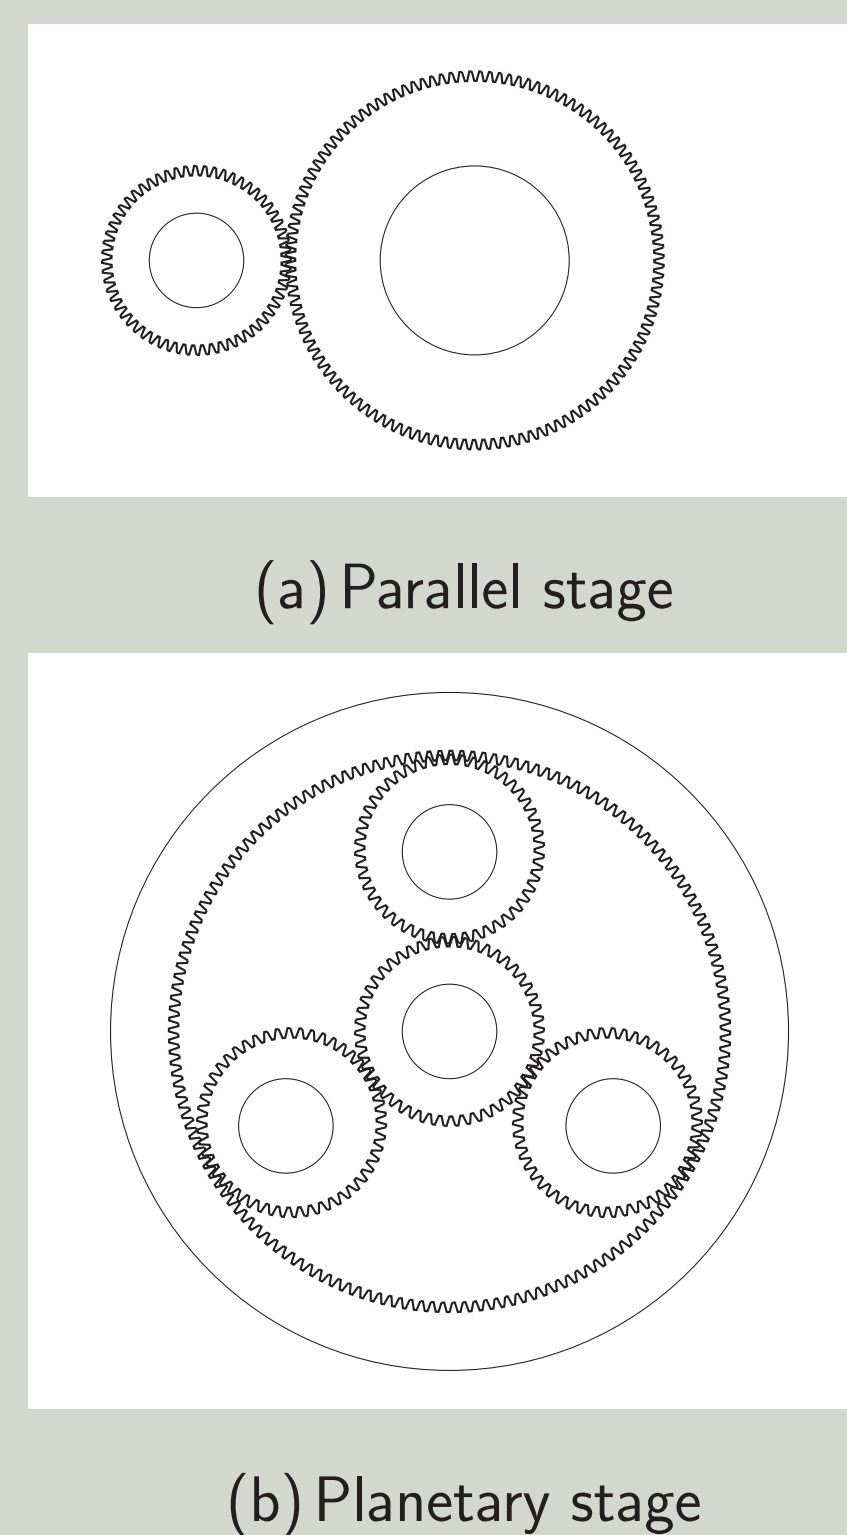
Wind turbine gearboxes are composed of one or more planetary or parallel stages.
